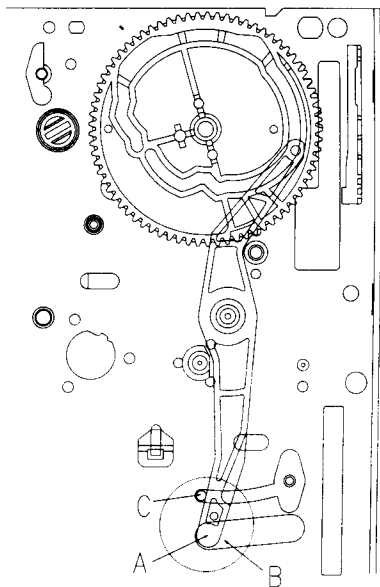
ASSEMBLY OF THE CAM GEAR & RELAY LEVER
